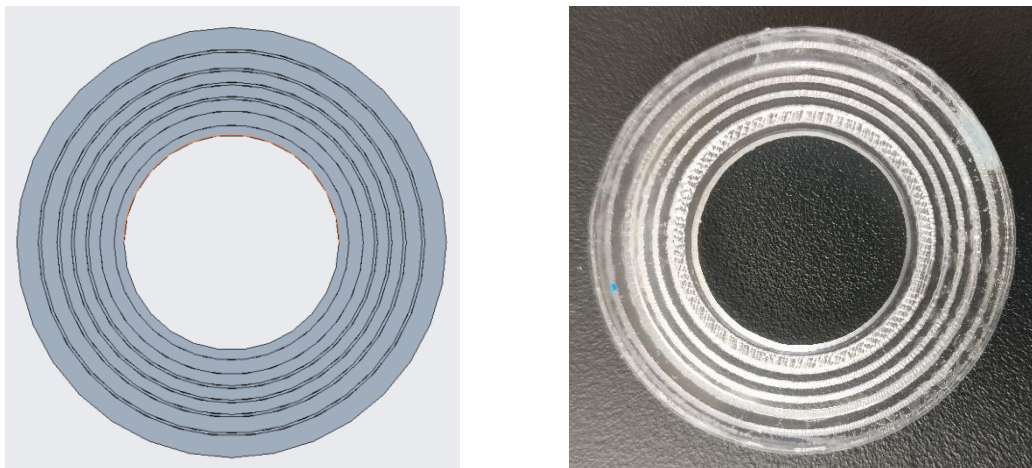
(a): Graphic of proposed clamp piece (b) Laser cut clamp piece
